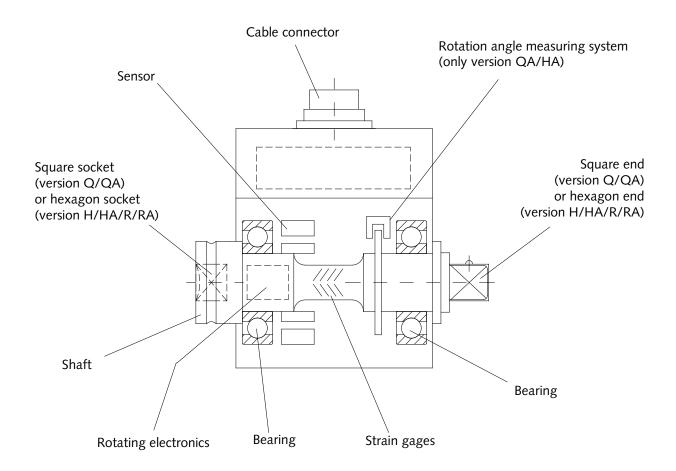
Mechanical design Mini-Smart torque sensor Type 4502A...
